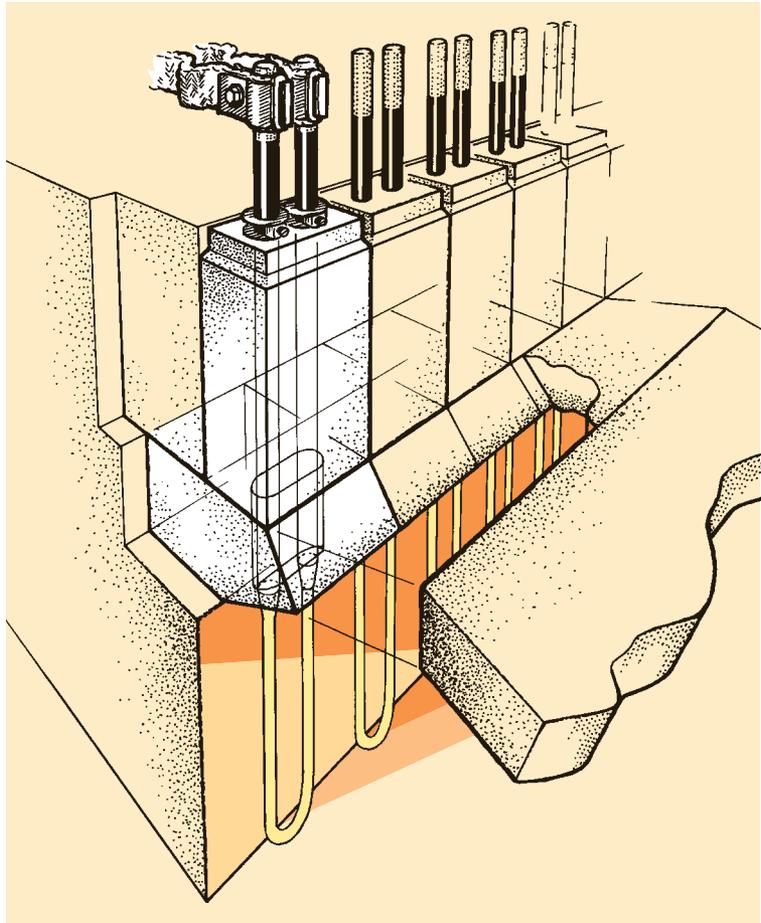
KANTHAL SUPER element installation with standard passage bricks in a brick lined furnace.
